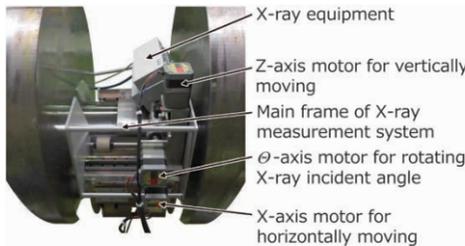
Photo of automatic X-ray system for measuring stress in fillet part of solid-type crank shaft
